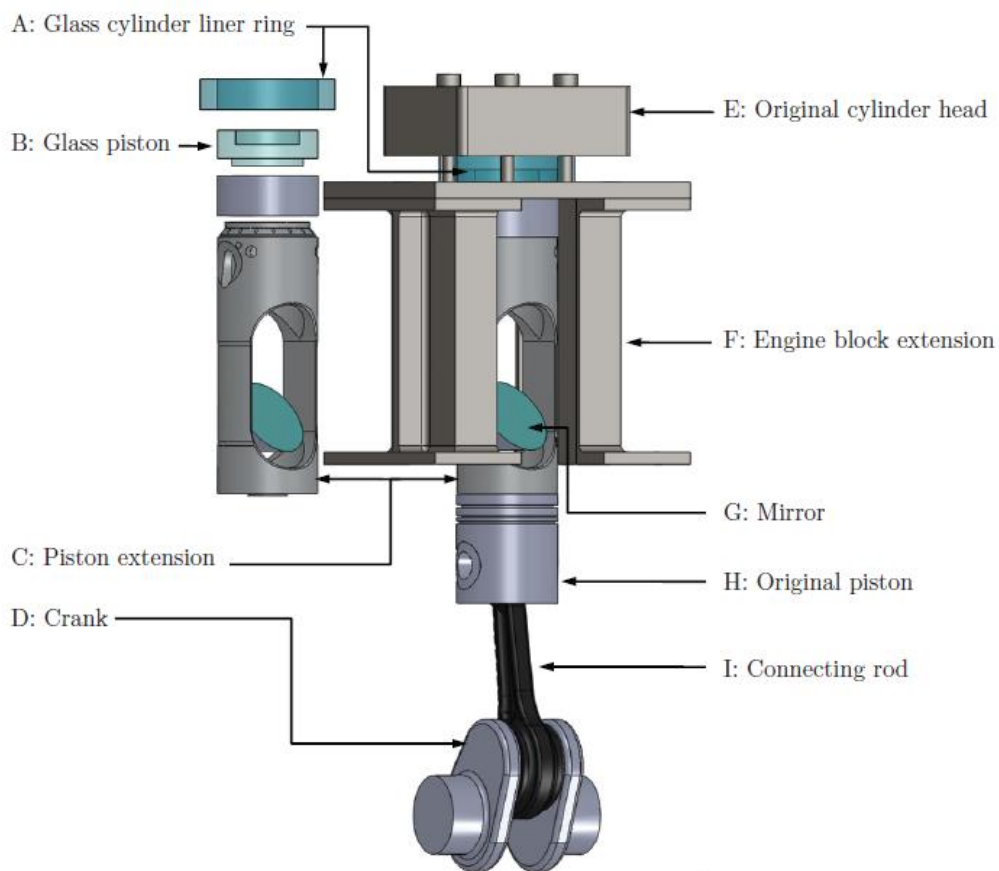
Optical engine of Bowditch design. Items A, B, C, F, and G are added to achieve optical access to the combustion chamber while the rest are all-metal engine parts. Reproduced from [44].
